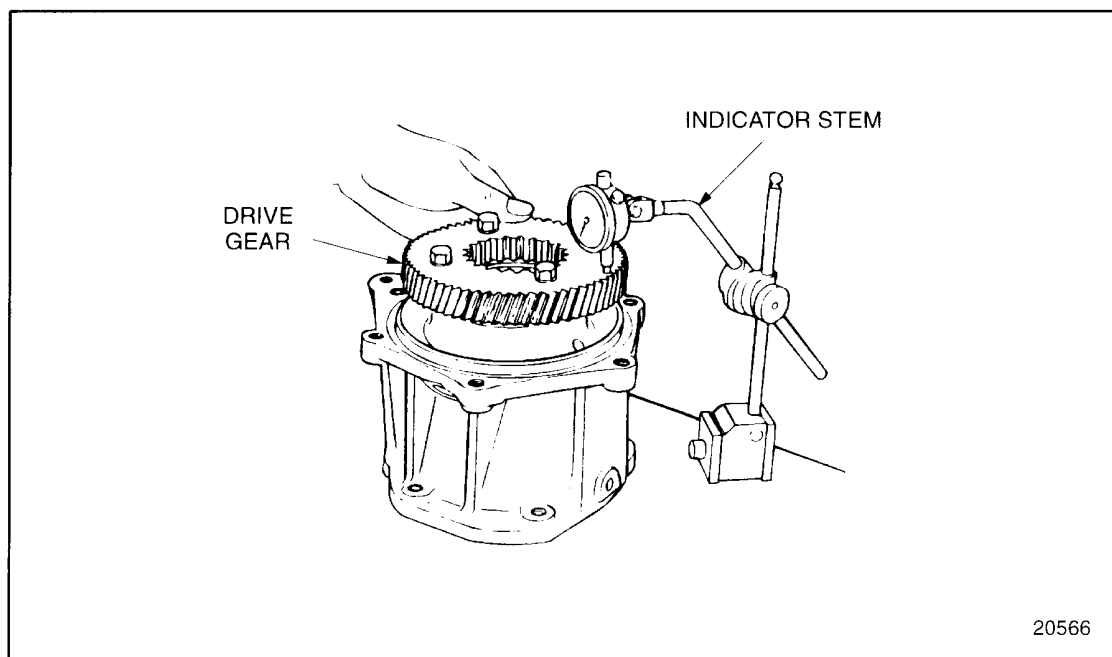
Measuring Air Compressor Drive Gear TIR
